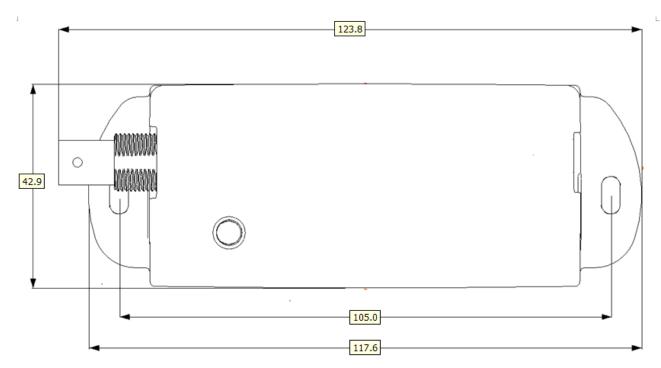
LDSBus Salinity Sensor Adapter Dimension - Top View
